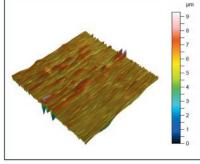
Base shaft surface after fatigue tests - distinct traces of fretting wear on the shaft edges of lower intensity into the connection centre, magnified. about 3x [6]
